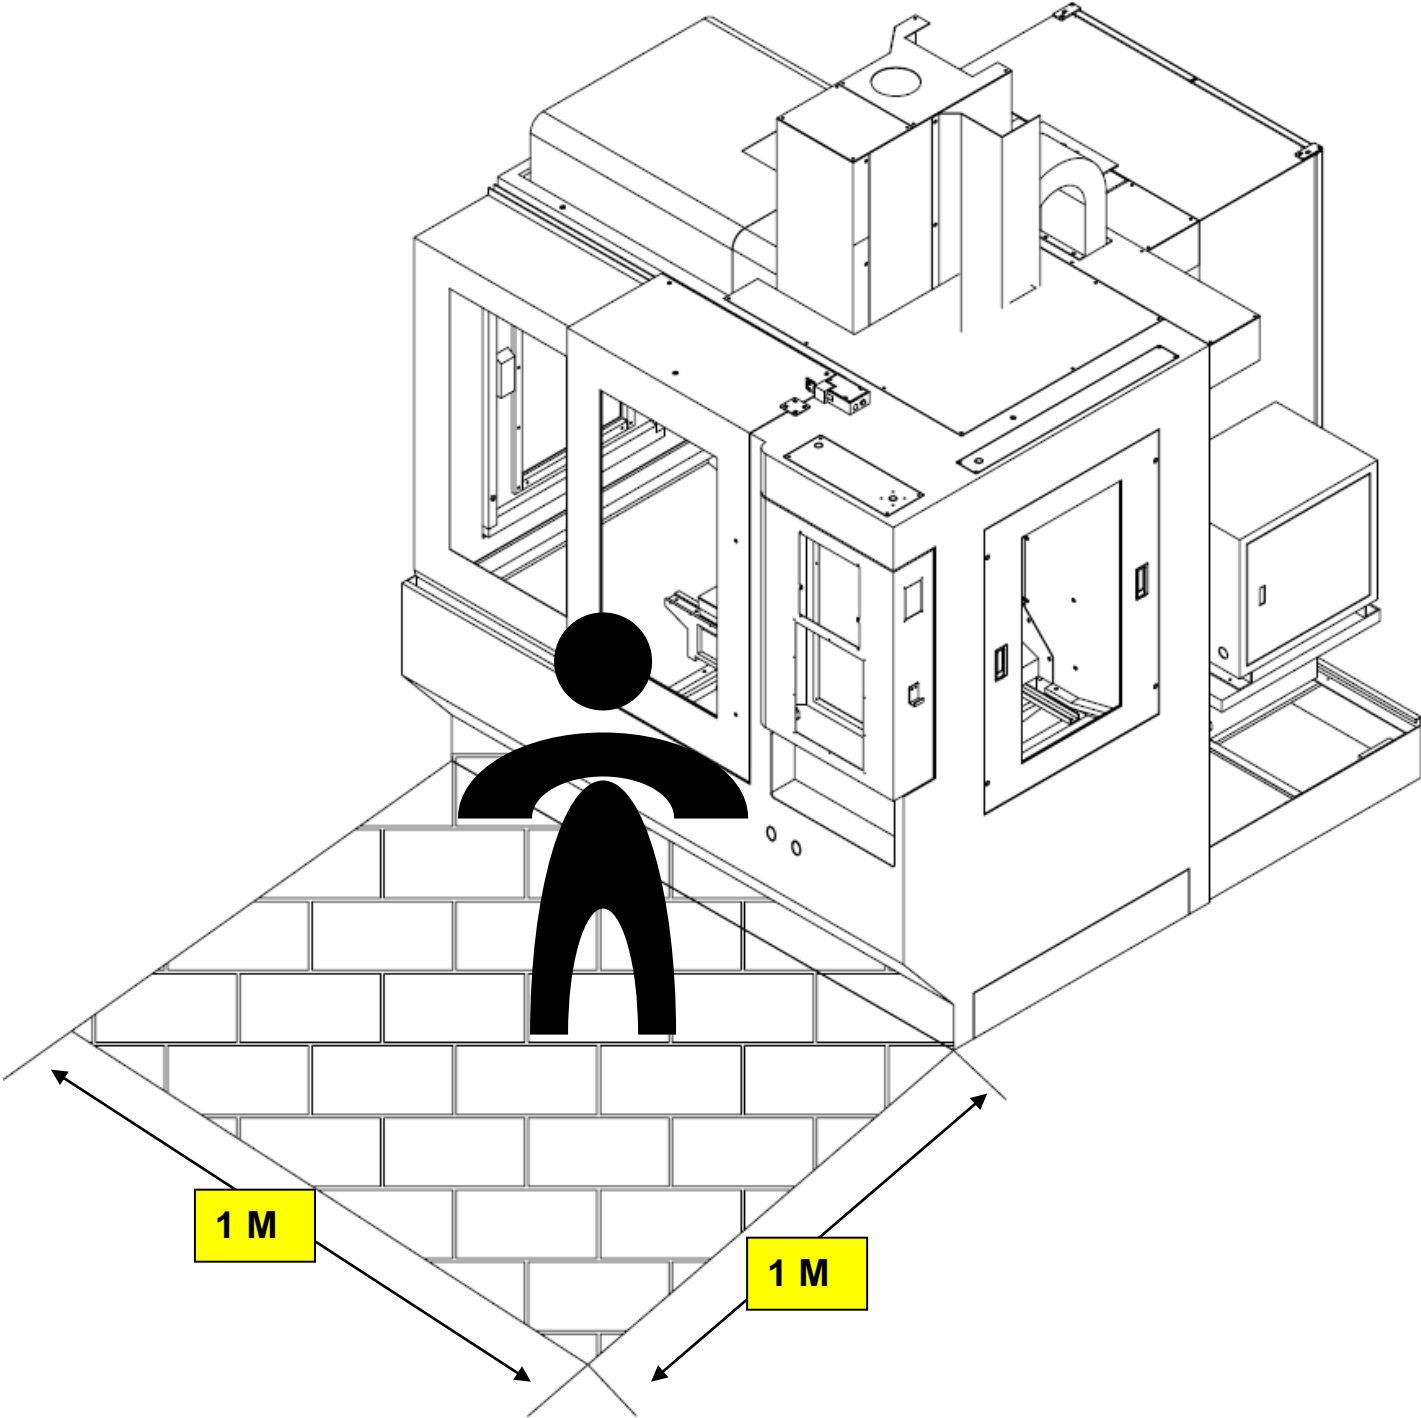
OPERATOR POSITION VIEW OF MACHINE
